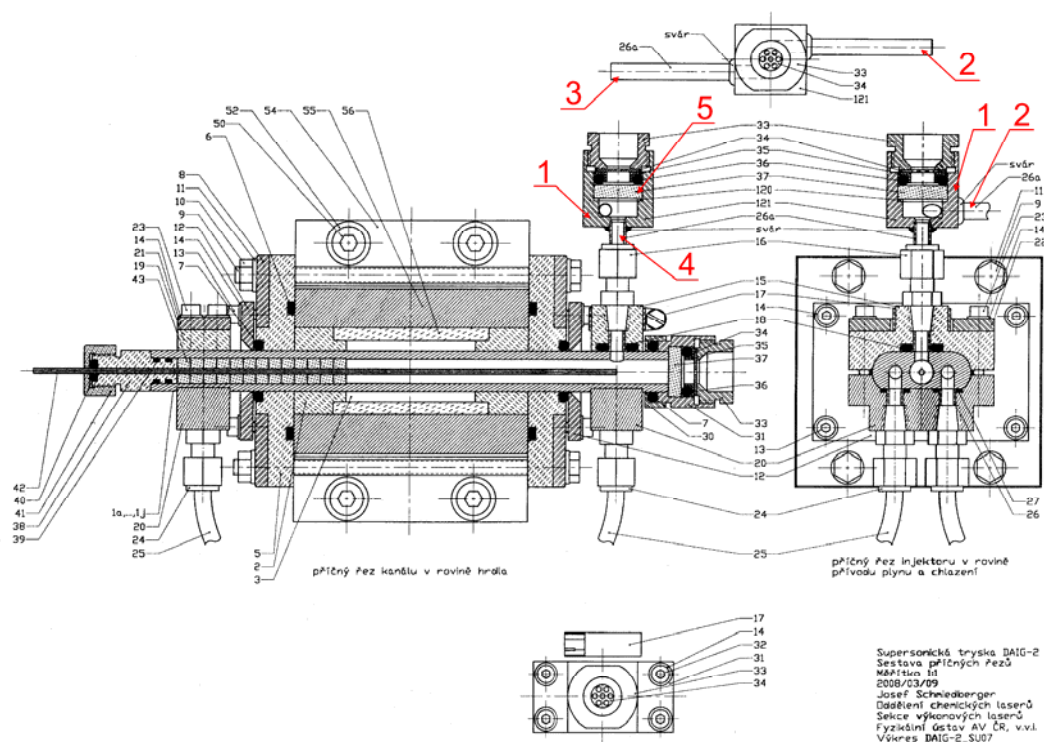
Technical drawing of top view of DAIG device with details of secondary gas mixing chamber
